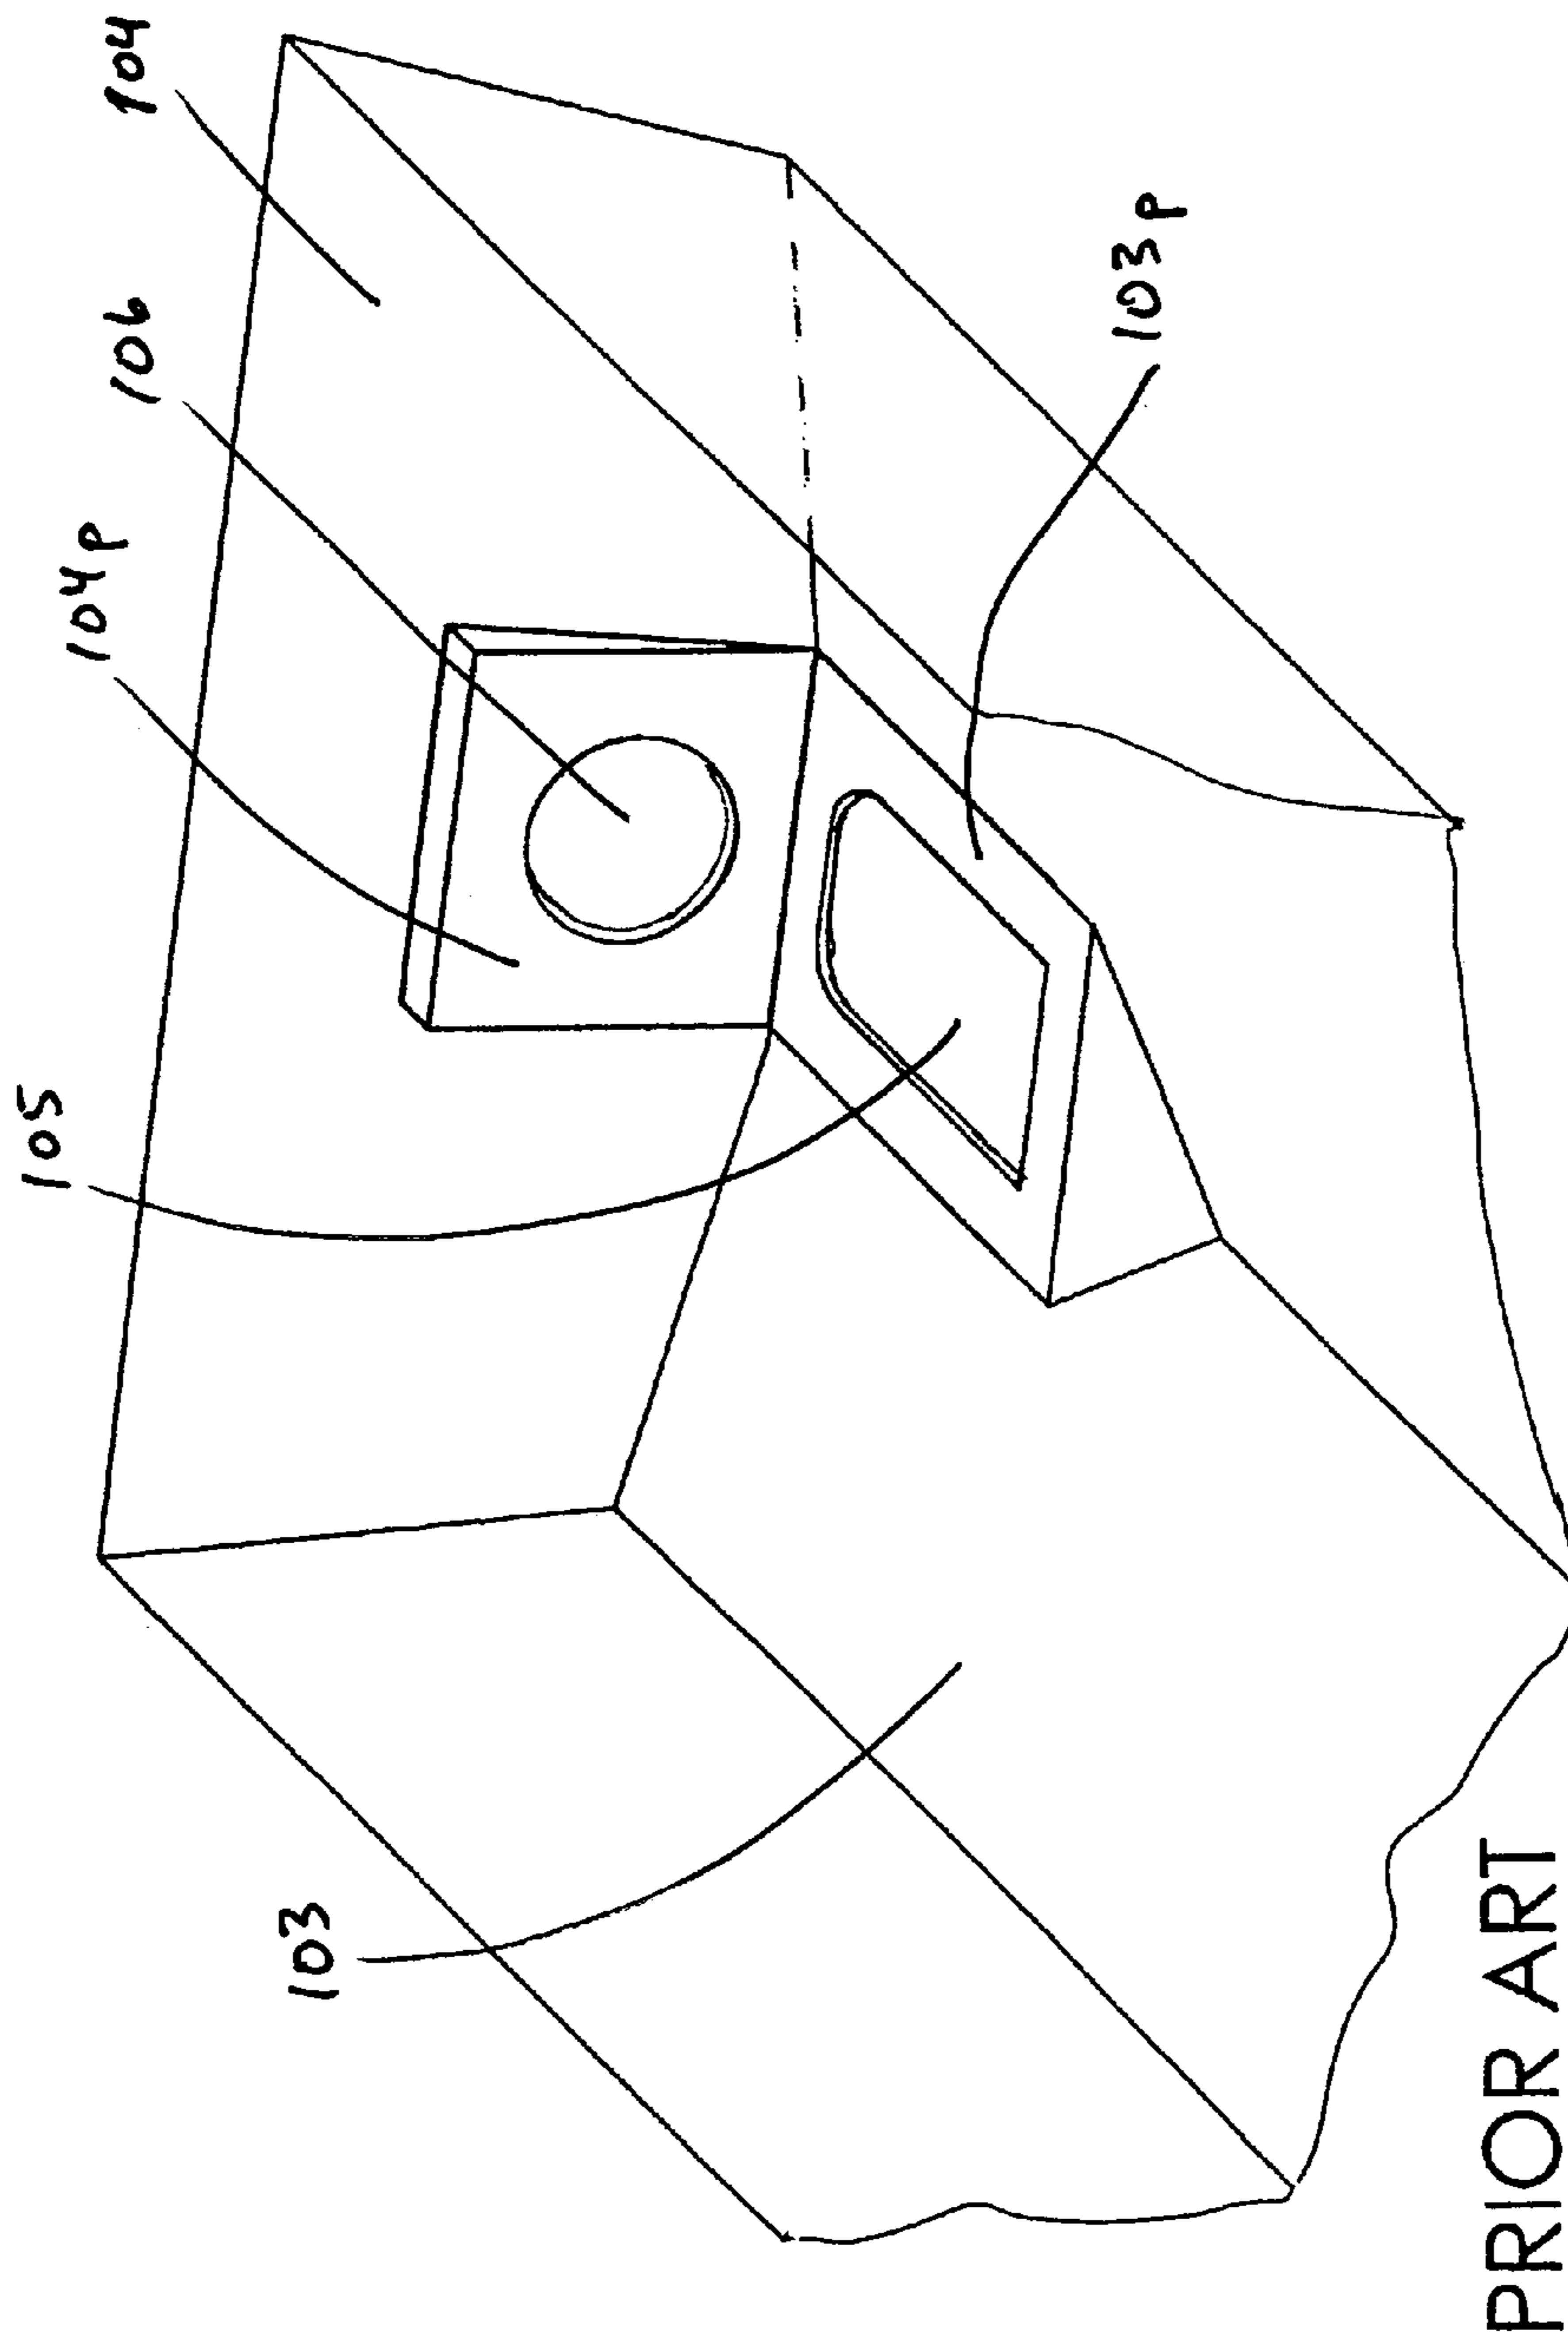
B BOTTOM AND TRANSOM OPENINGS IN VESSEL HULL
